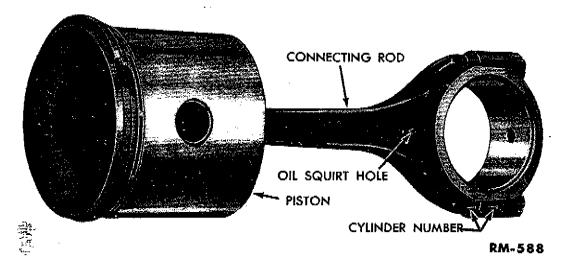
Assembled Connecting Rod and Piston, Showing Oil Squirt Hole
